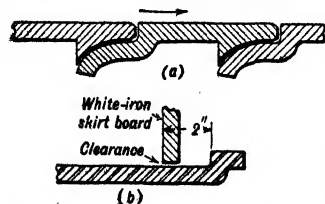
Transverse (a) and longitudinal (b) sections of manganese-steel platens on apron feeders at INSPIRATION.
